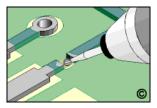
Make 1 or 2 cuts as needed using a Ball Mill and Micro-Drill.
